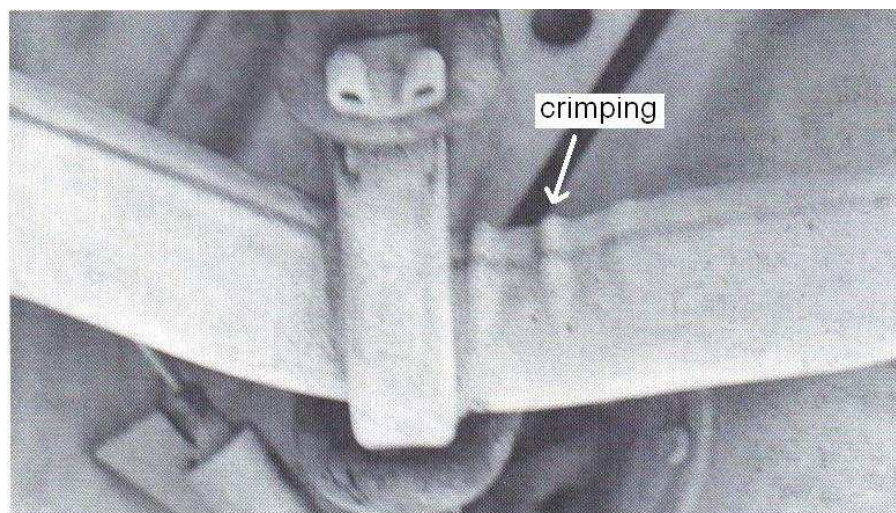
Crimping, resulting from poorly formed bends, reduces power
